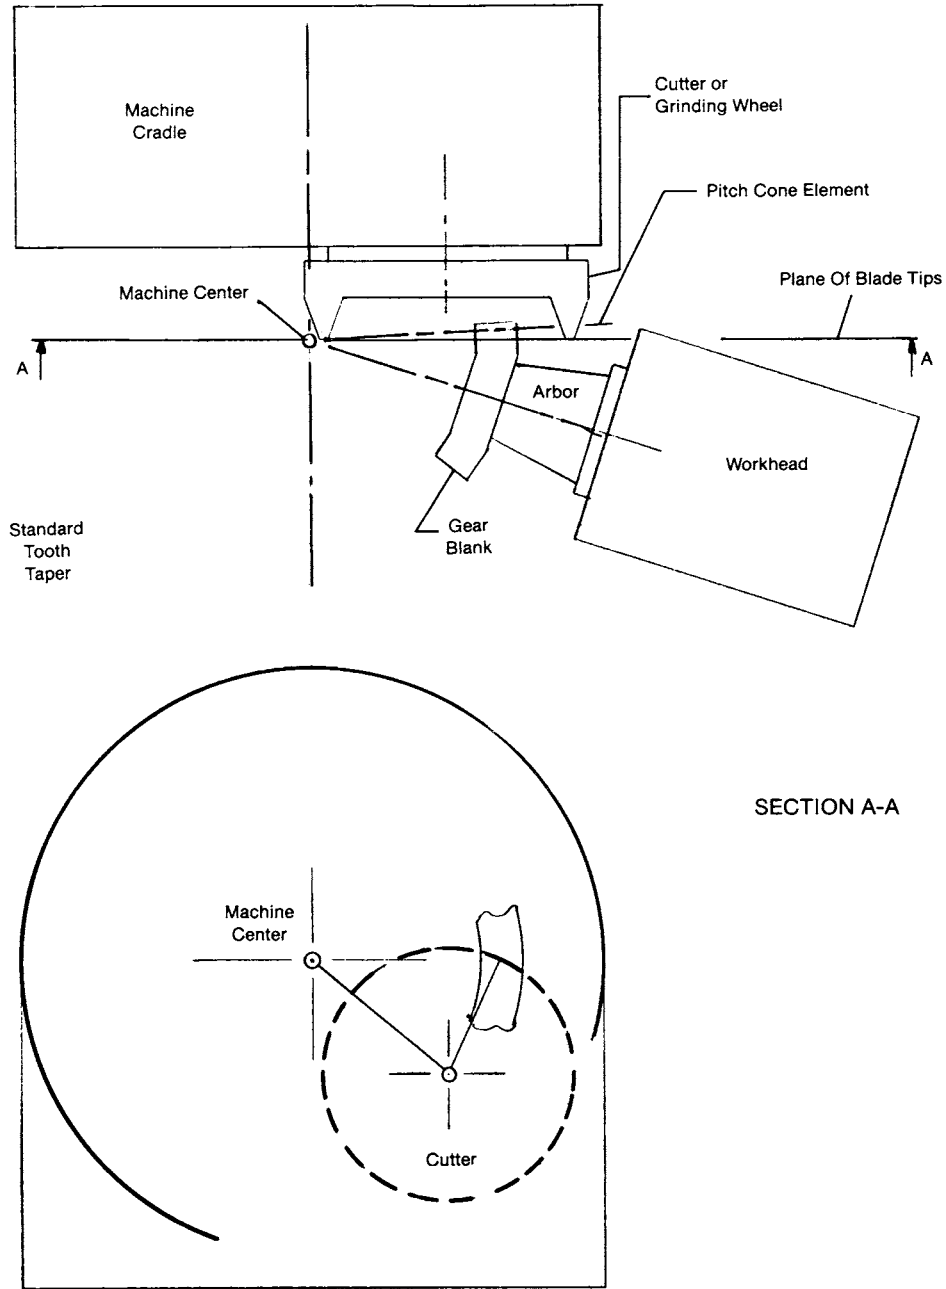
Basic machine setup of spiral-bevel face-mill generator.
